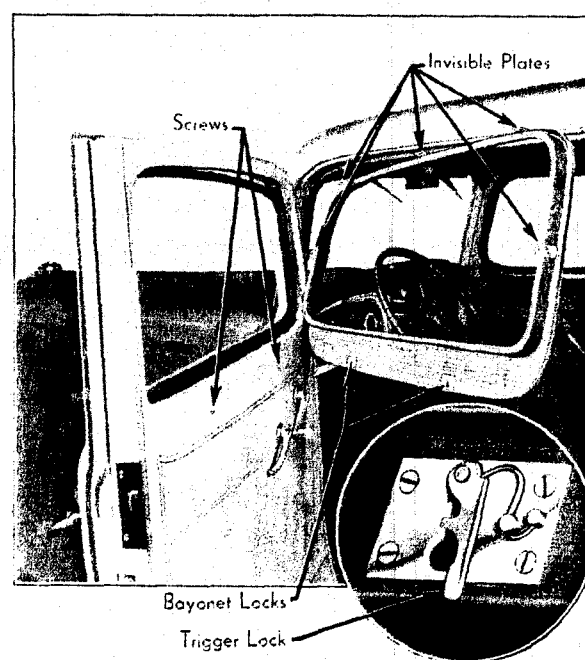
View of door window garnish moulding removed to show invisible plates and bayonet locks. Insert shows trigger lock construction used on some bodies.
